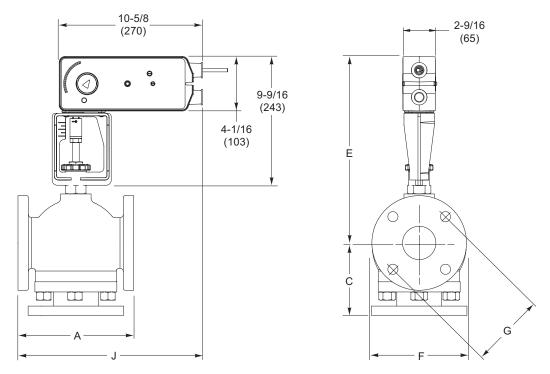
Mx61-720x with 2-1/2" to 4" 3-Way Flanged Globe Valve.
